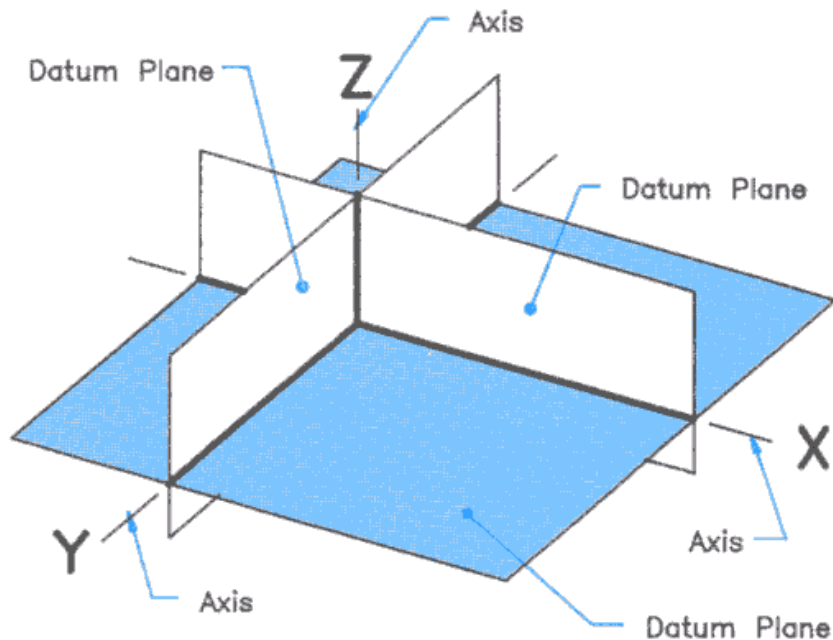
A datum reference frame is theoretically perfect and is made of three mutually perpendicular planes.
